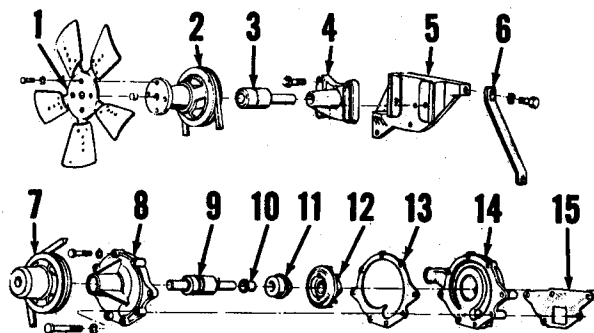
Exploded view of fan and bracket assembly (top) and water pump assembly (bottom).
